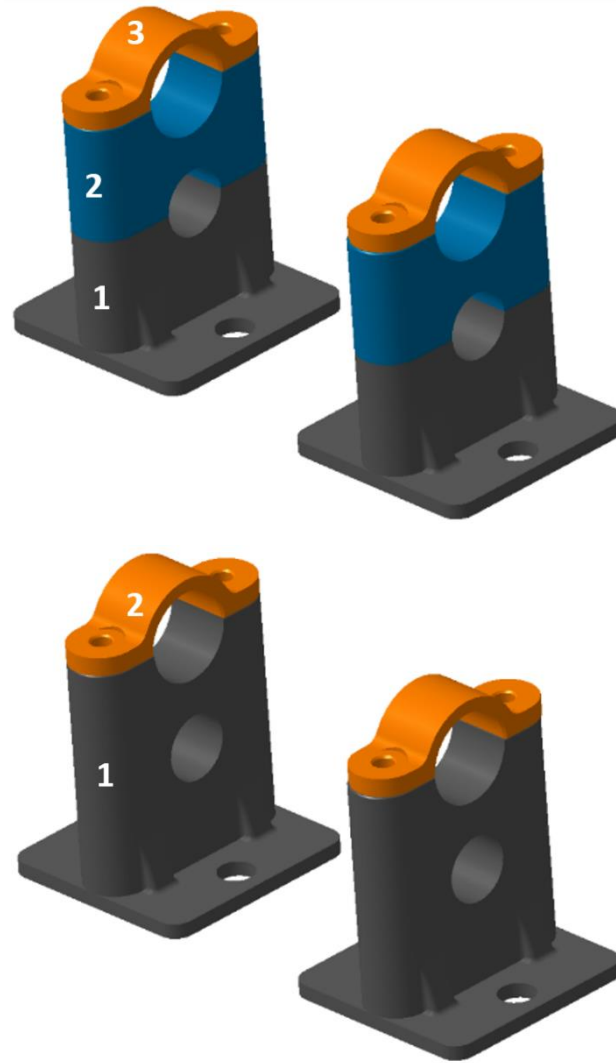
Support design for single-piece(above) & multi-piece(below) actuator link – chosen solution
